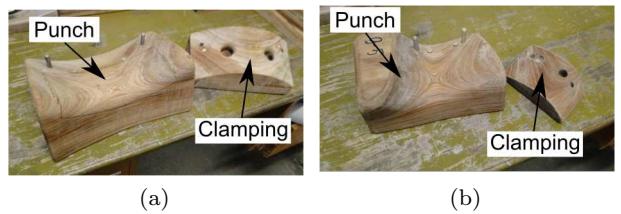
Forming tools used for a) Part 1; b) Part 2
